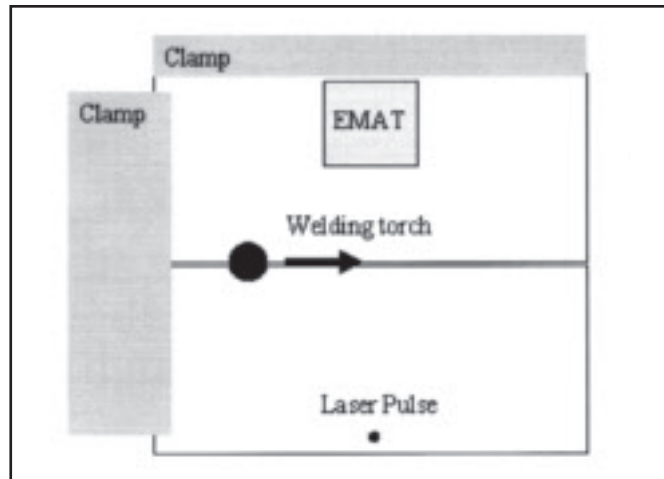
Top view of experimental setup to determine if high-temperature gradients affect measured weld penetration depth during welding.
